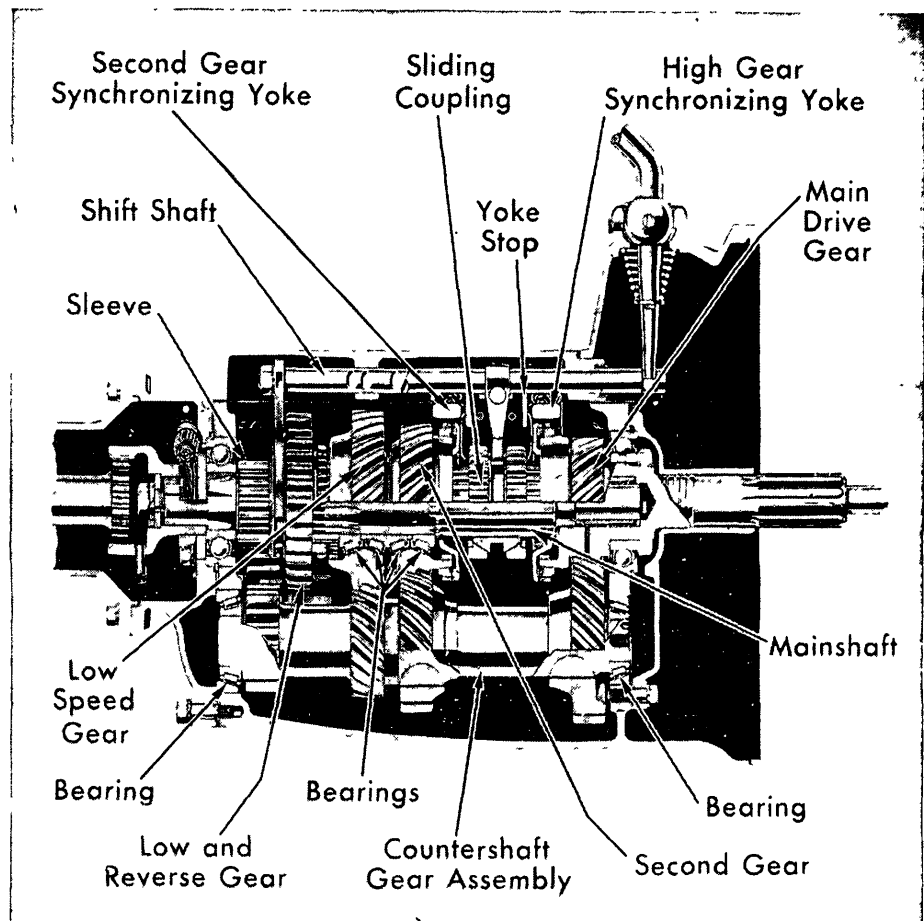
Transmission. Typical of 1935 Cadillac; 1936 series, 70, 75, 80, 85, 90; 1937 V16
